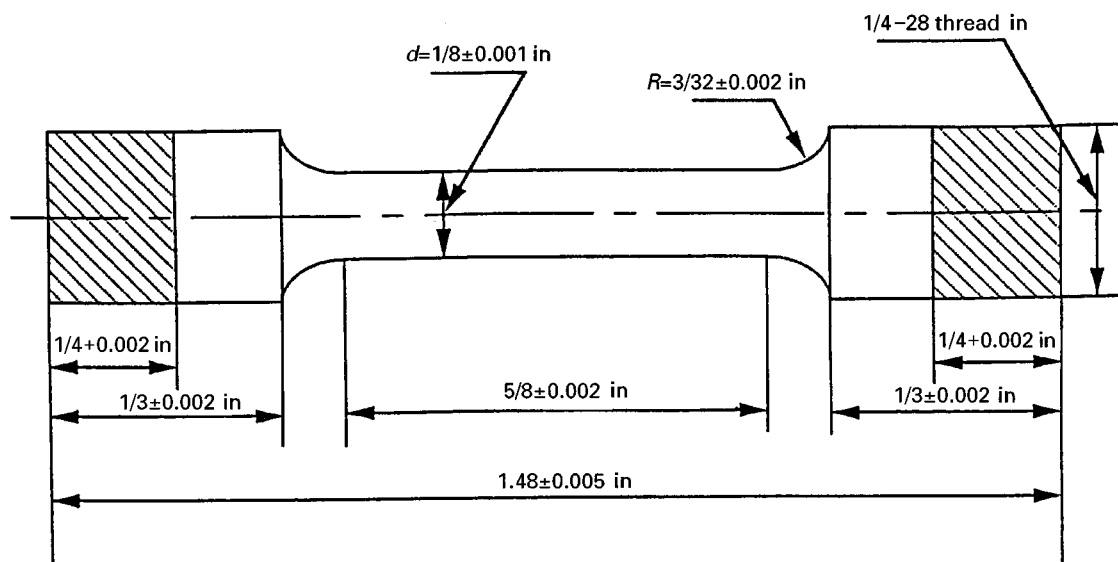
Tensile test specimen geometry and dimensions for both the IC-50 and the IC-396 alloys.
